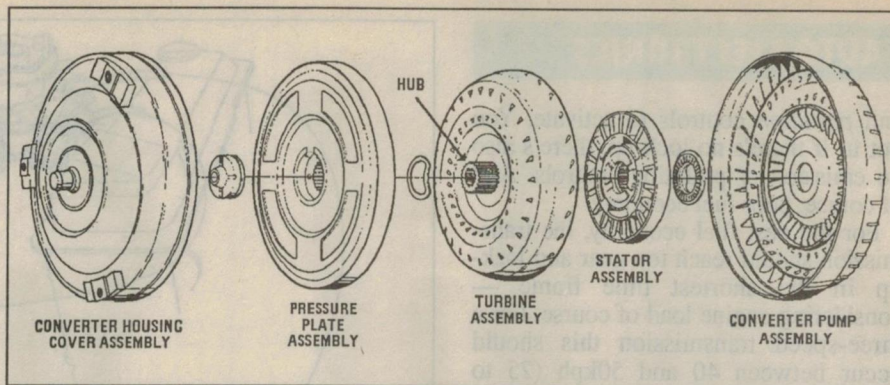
An exploded view of a 'lock-up' torque converter, showing its construction.
